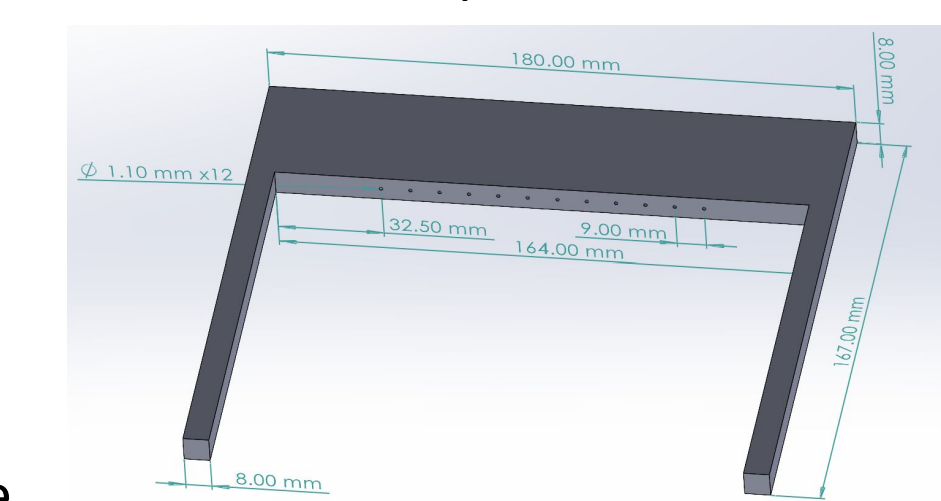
Dimensioned CAD model of stamper handle with holes for rods
